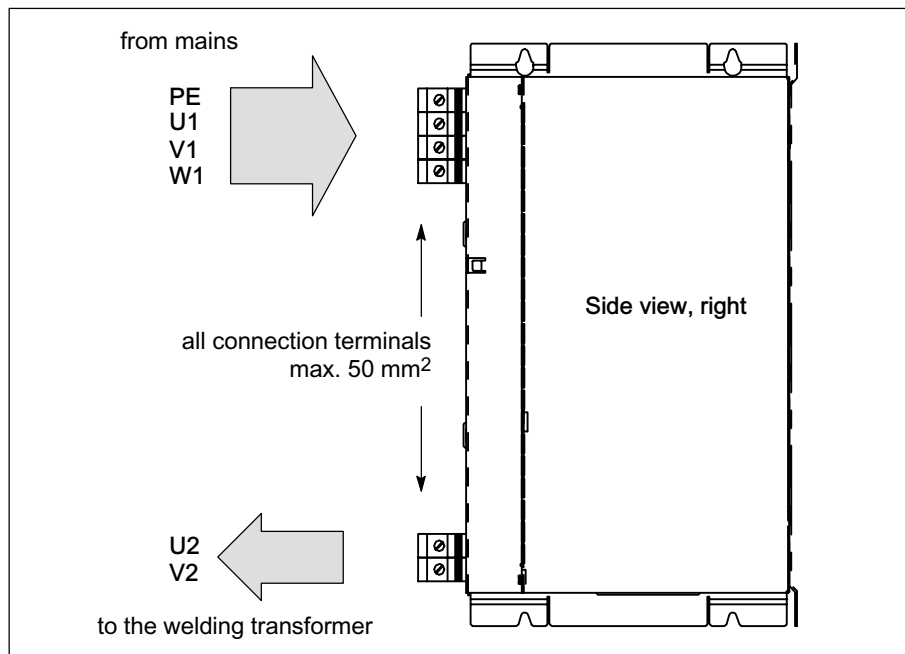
Location of the mains and transformer connections: PSI 61xx.xxx Lx/Wx
